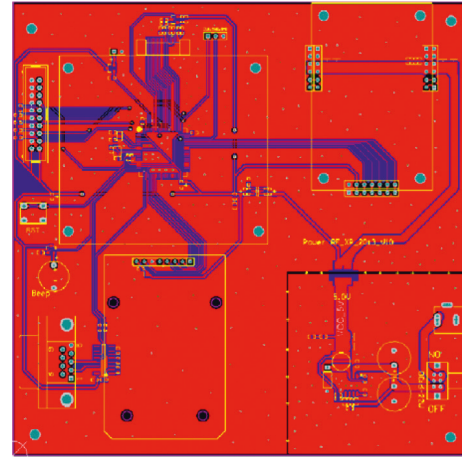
Top PCB design drawing of data acquisition terminal.
